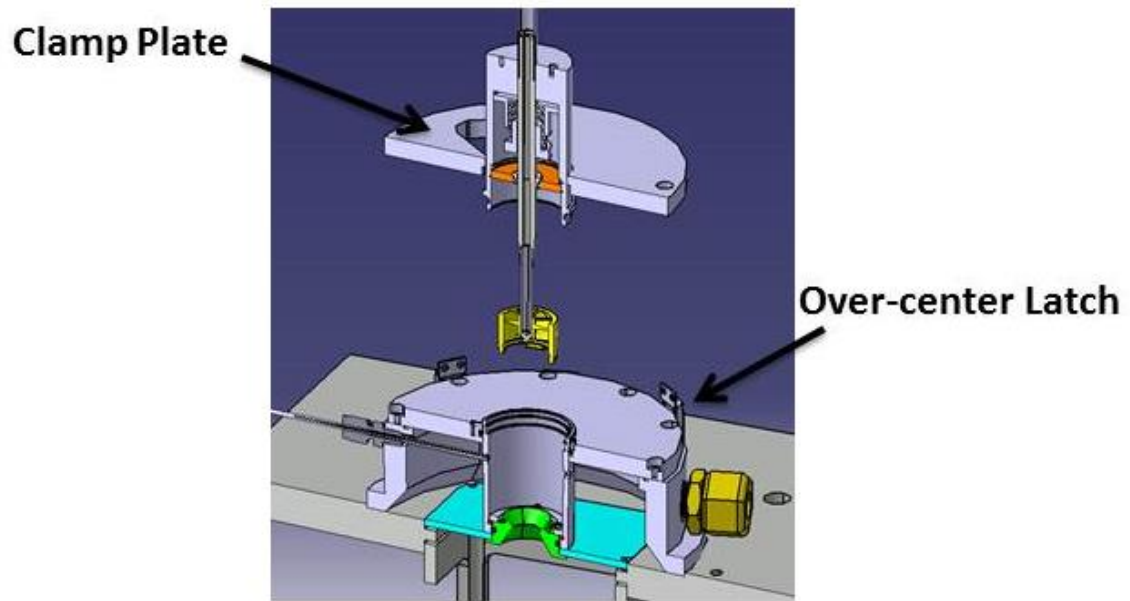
Split burner housing to allow installation of swirler. Once installed, the fuel injector is guided into the swirler until the burner housing halves engage. The clamp plate, which holds the burner housing in place, is then secured with over-center latches.
